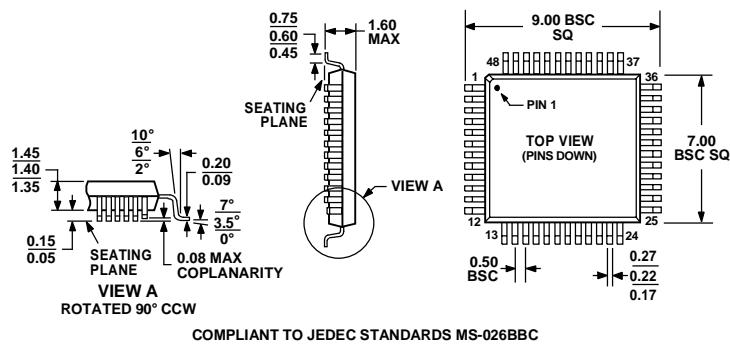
48-Lead Low-Profile Quad Flat Package [LQFP]
